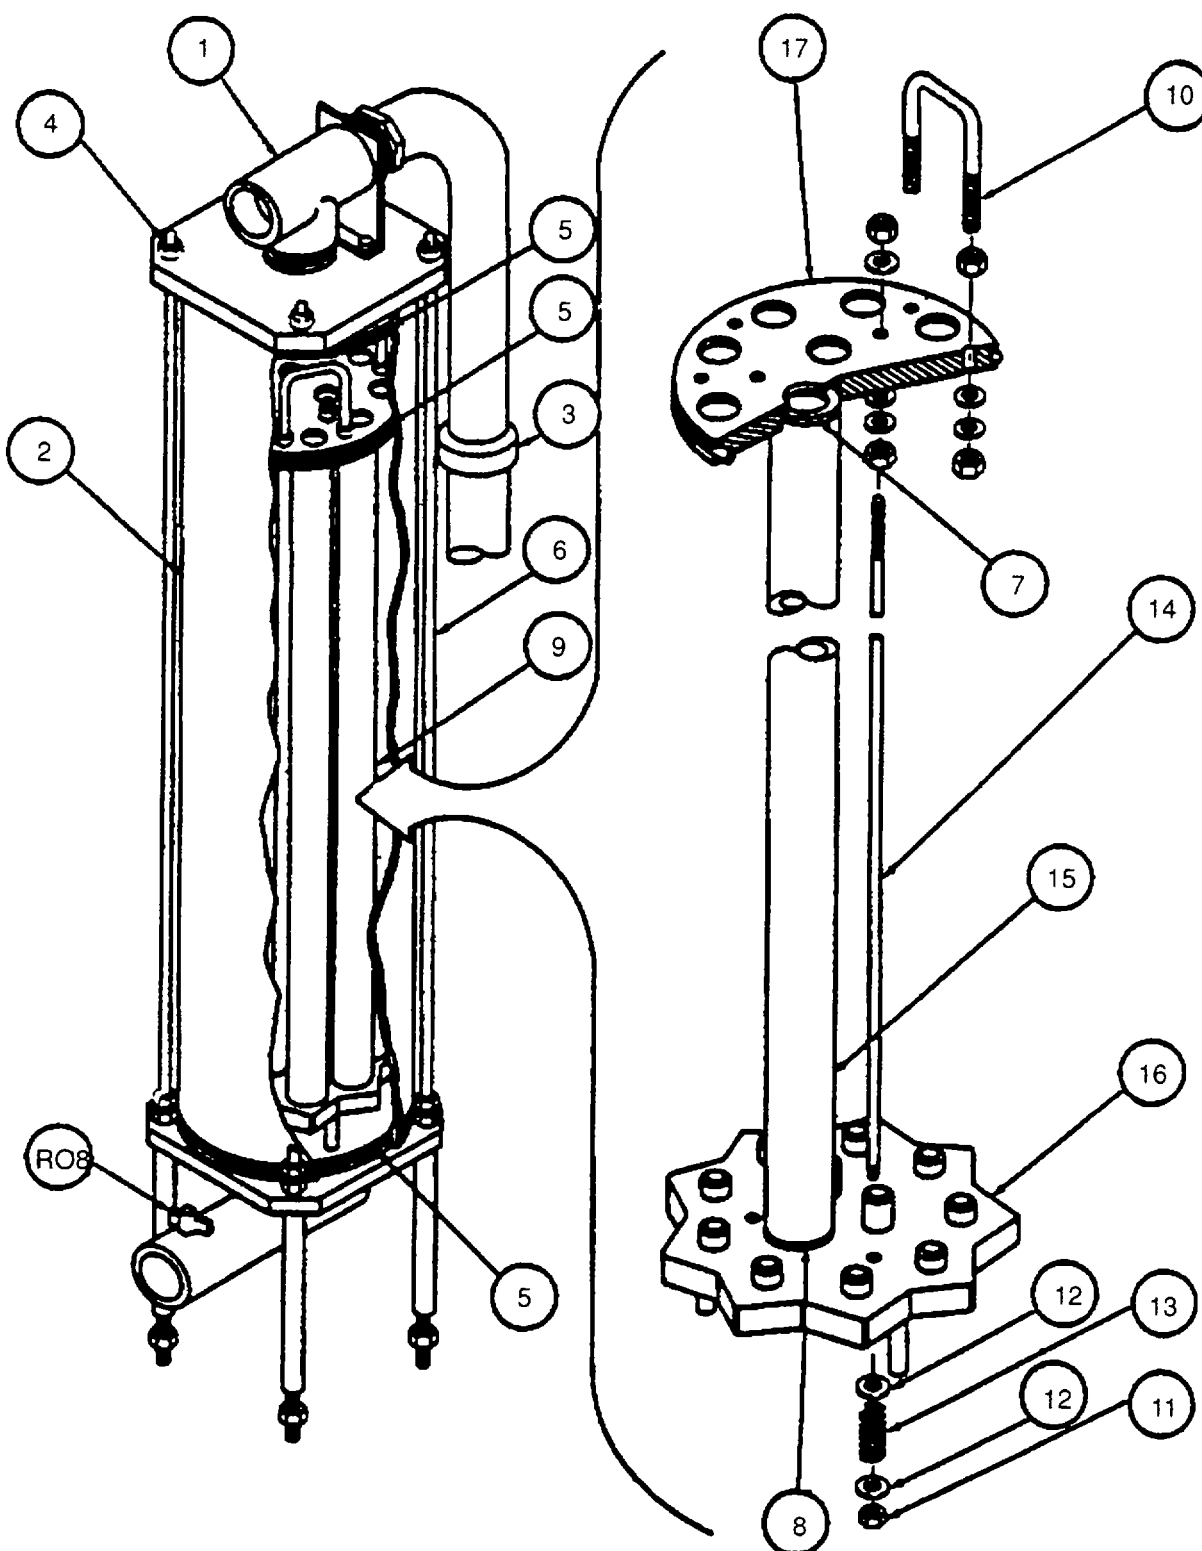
Cartridge Filter Assembly (Sheet 1 of 2)
